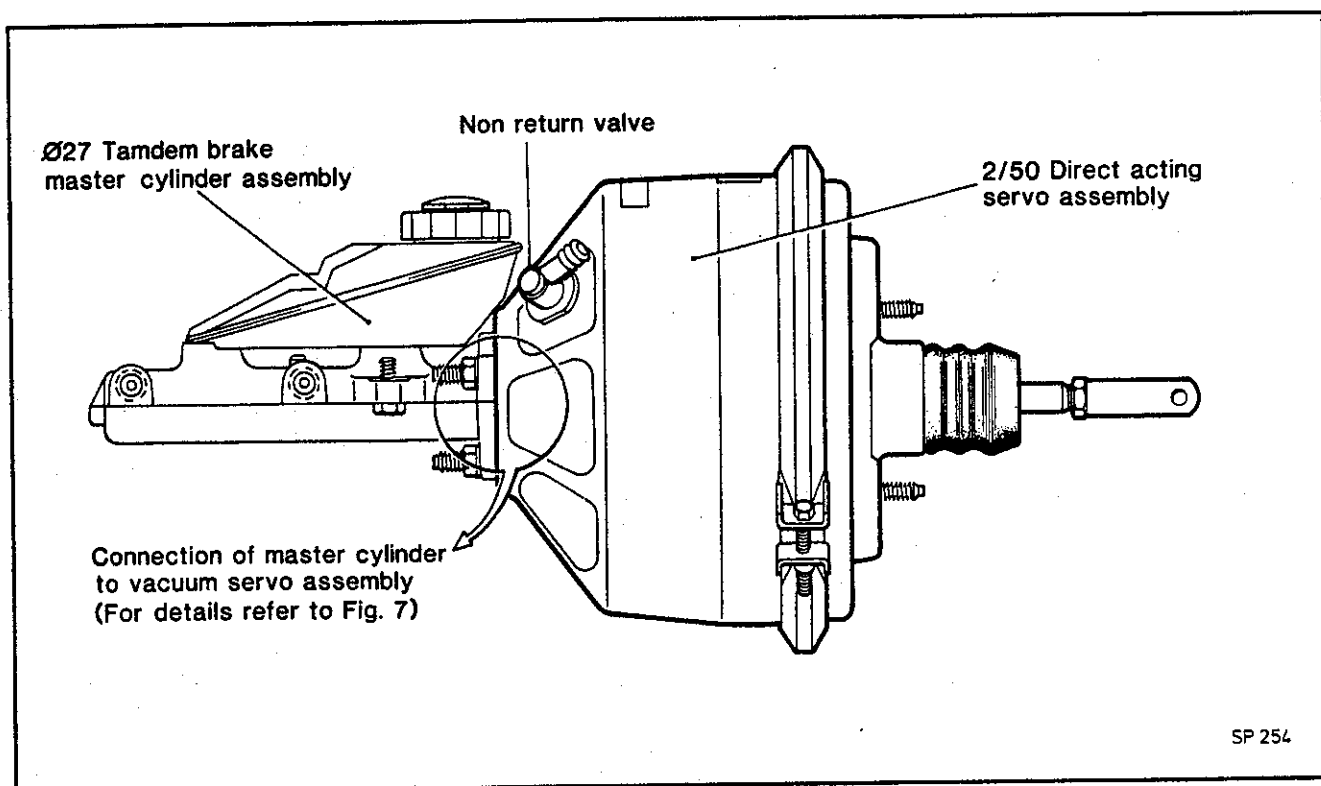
Assembly of Vacuum Servo and Tandem Brake Master Cylinder
